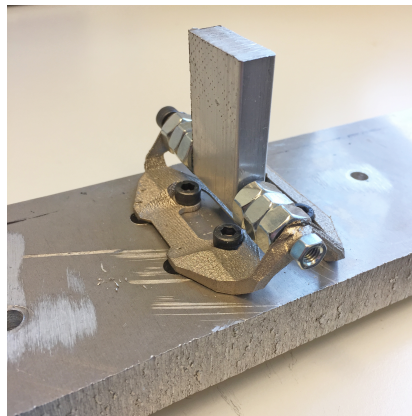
Because the screws might have been ripped out of a ski before the binding would be destroyed, an aluminium profile was made instead of testing a ski.
